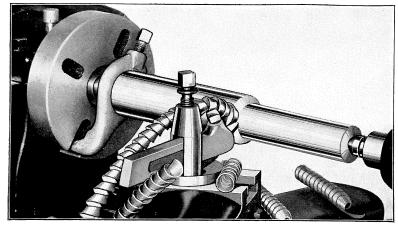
A bar of steel being machined in the lathe with a correctly ground cutter bit inserted in a lathe tool holder.
